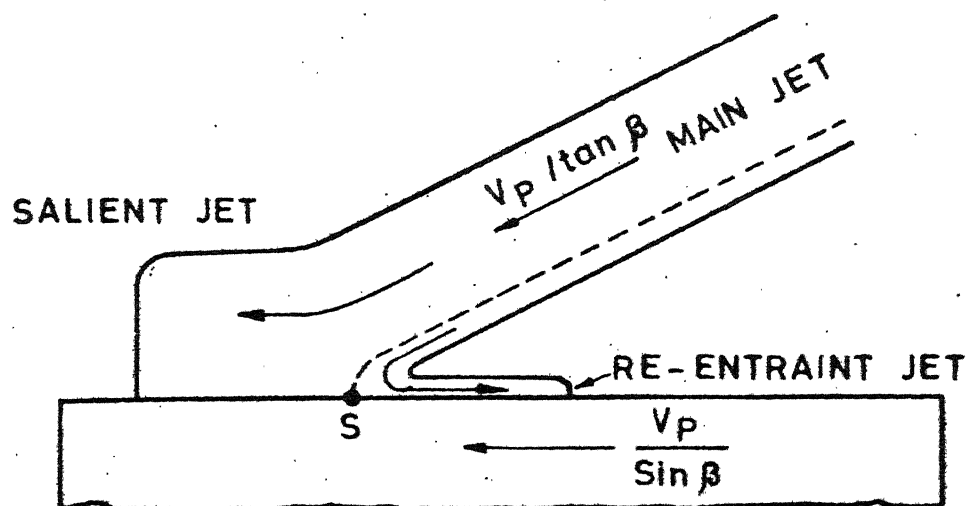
INCLINED ARRANGEMENT FOR EXPLOSIVE WELDING.
